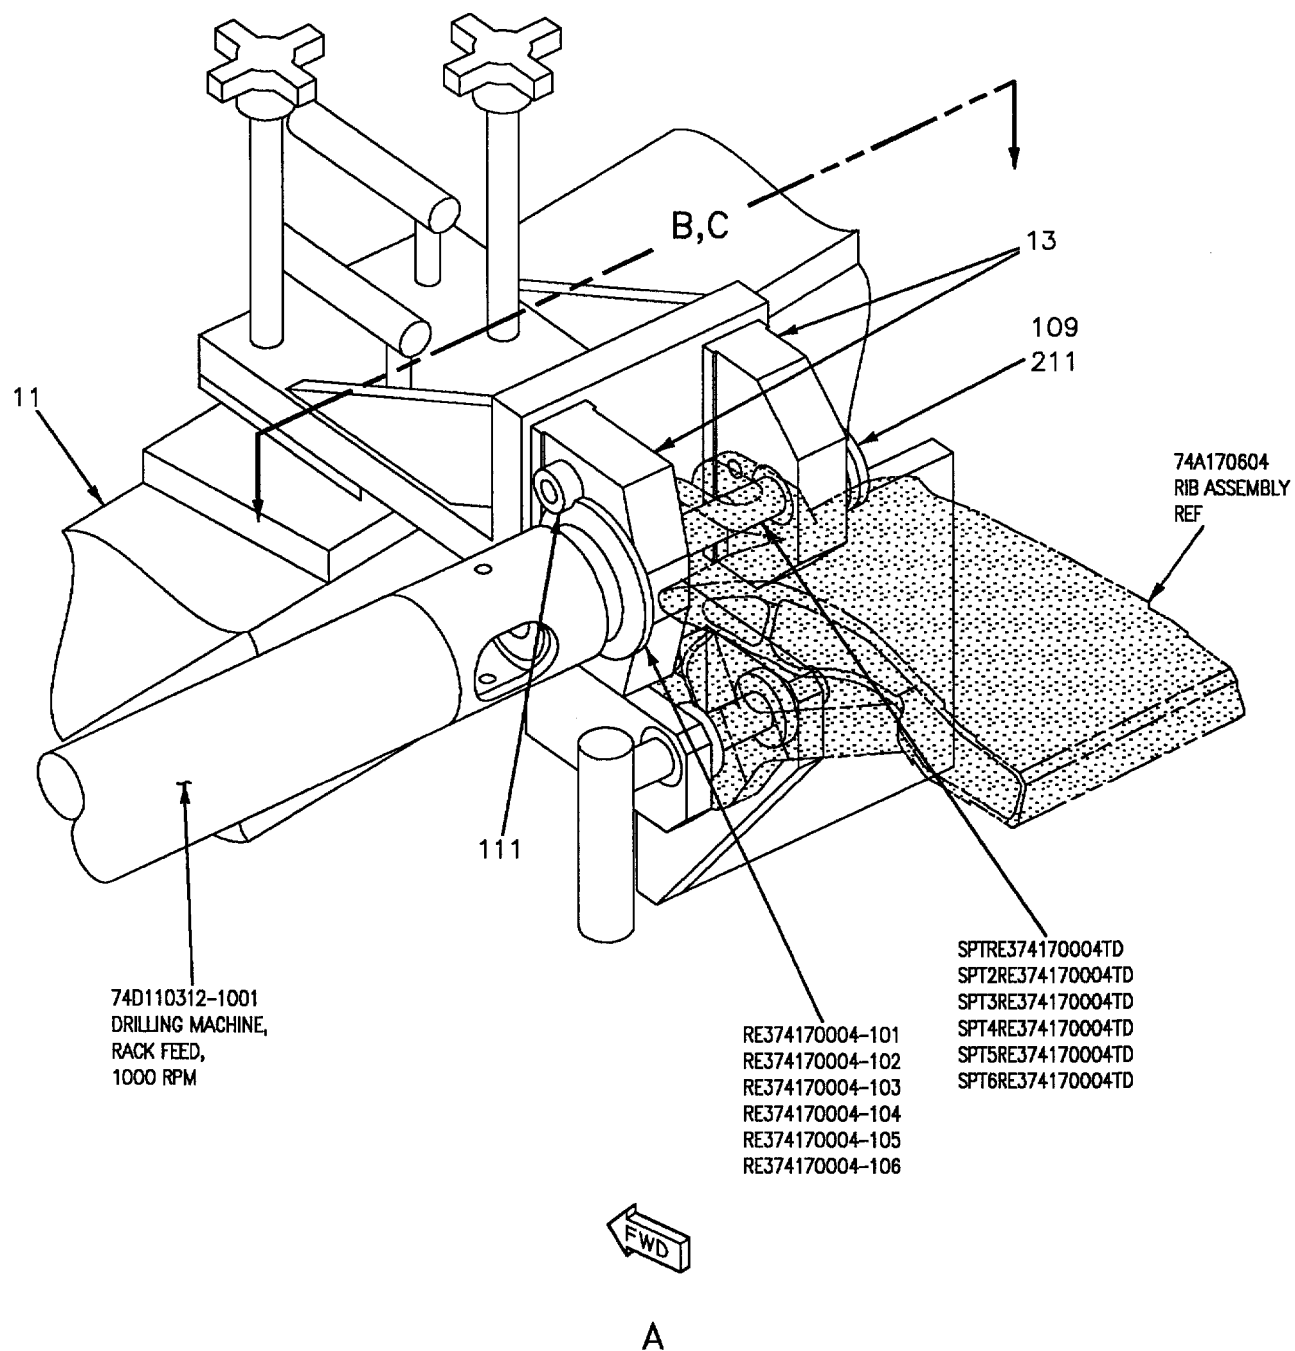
Bushing Replacement at 74A170604 Rib Assembly (Sheet 2)
